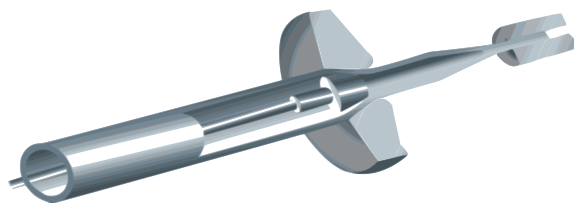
Tube drawing scheme using plug drawing technology [1]
